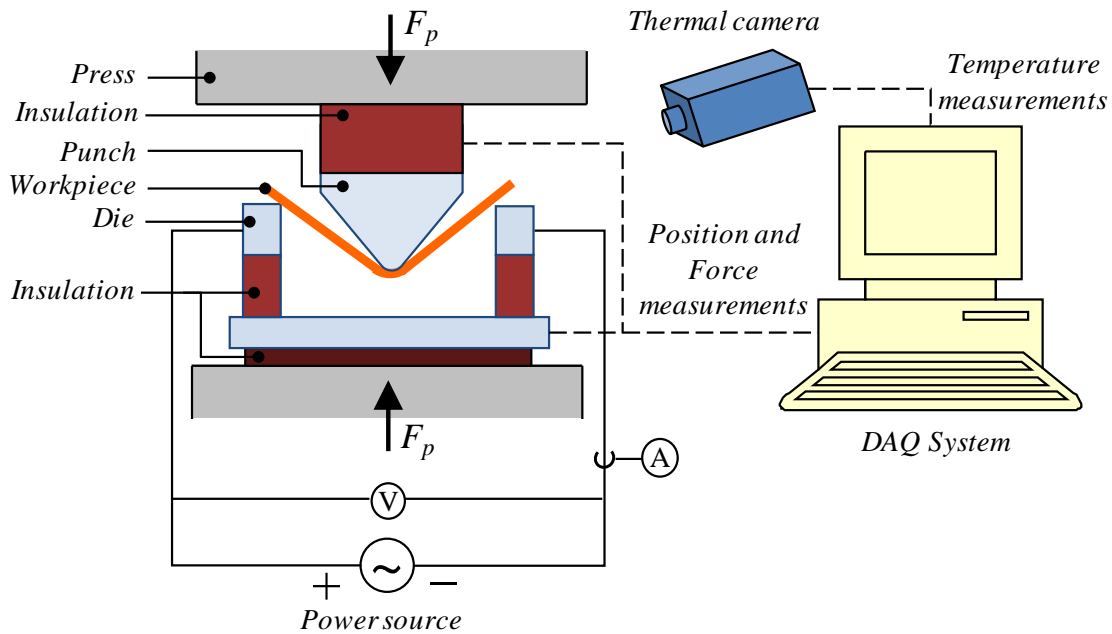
Schematic of an EA-Bending test [89]-[90]. The setup consists of an insulated and adjustable bending die, along with insulation to protect the machinery from the electricity.
